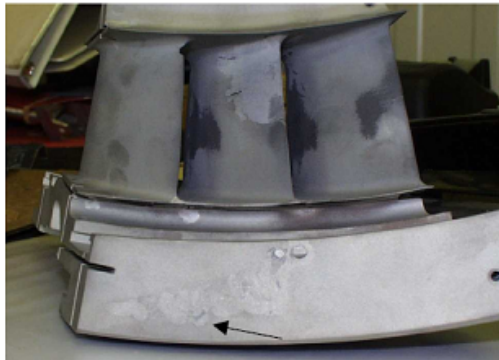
Strain age cracking, on the shroud/butress, after initial attempts at a weld repair.
